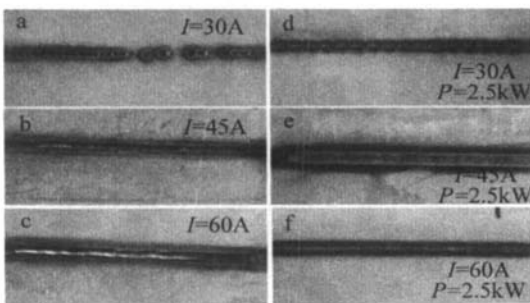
Surface morphology of arc and hybrid welds with little arc current. The welds show irregular shapes and spatter when arc current is low. When 2.5kW laser is added, the welds become smoother and more uniform.
